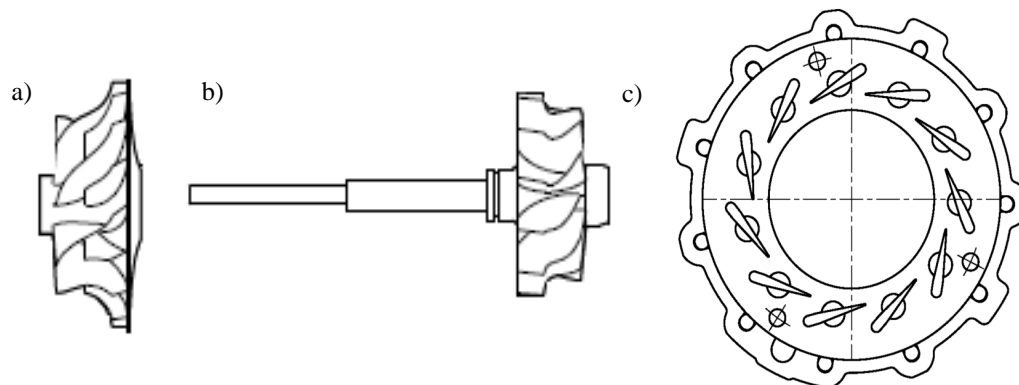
Selected elements of Garrett turbochargers 1749V: a) compressor wheel, b) shaft turbine rotor, c) set of blades control ring [1]
